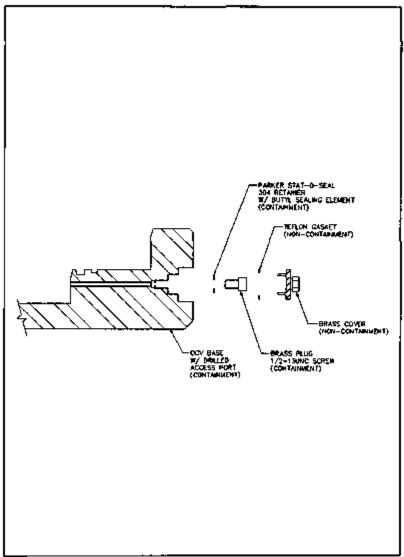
Exploded View of OCV Vent Port and Cover Design.
